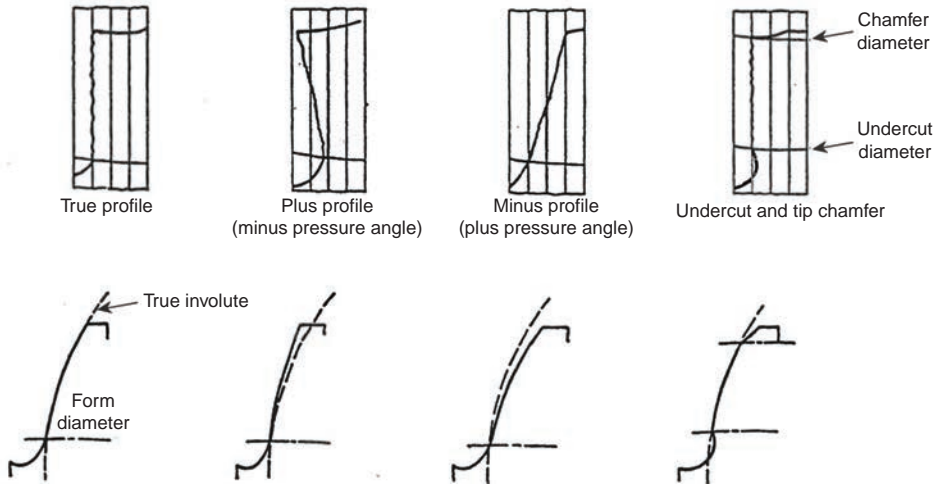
Typical tooth profile tolerance charts
